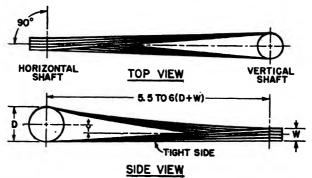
When a quarter-turn drive is viewed from above, a straight line drawn through the center of the vertical shaft should pass through the horizontal-shaft sheave at its center, and the horizontal shaft should be at right angles to this line. When the same drive is viewed from the side, the horizontal-shaft center should be a distance Y above a level line extending through the center of the vertical-shaft sheave face. Values of Y are shown in Table 32.
